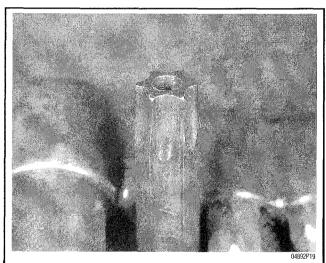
and tamper resistant drivers are required to remove special fasteners installed by the manufacturers
